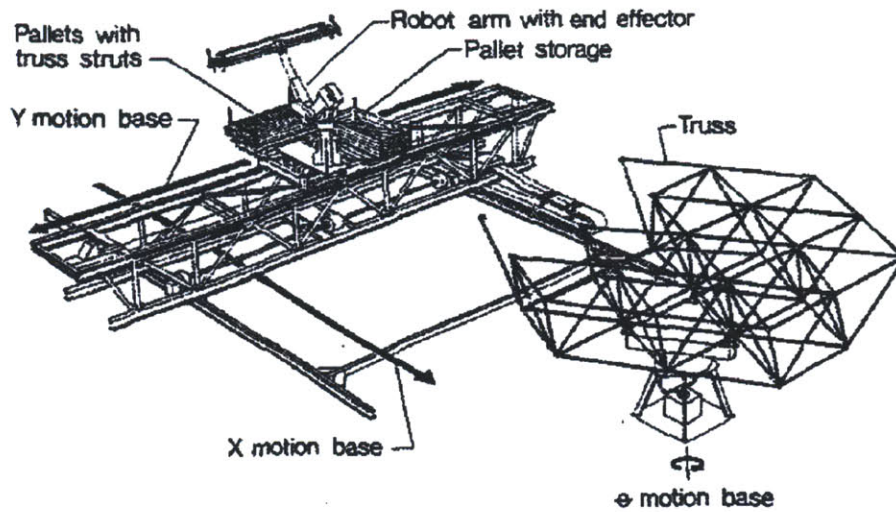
Drawing of the Automated Structure Assembly Laboratory [33]
